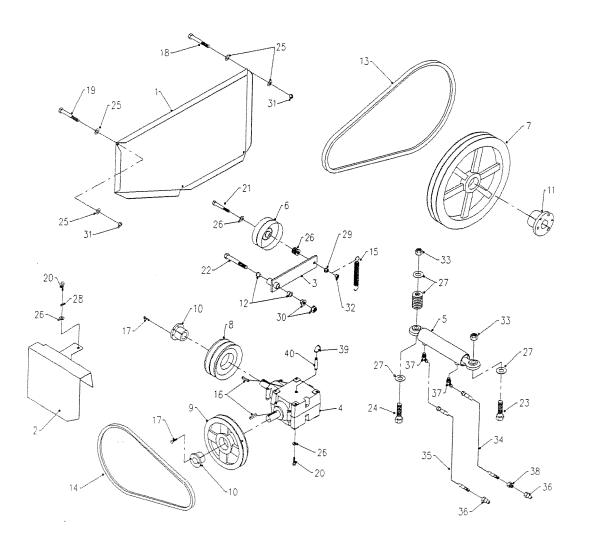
HYDRAULICS, PULLEYS, SHIELDS PARTS
